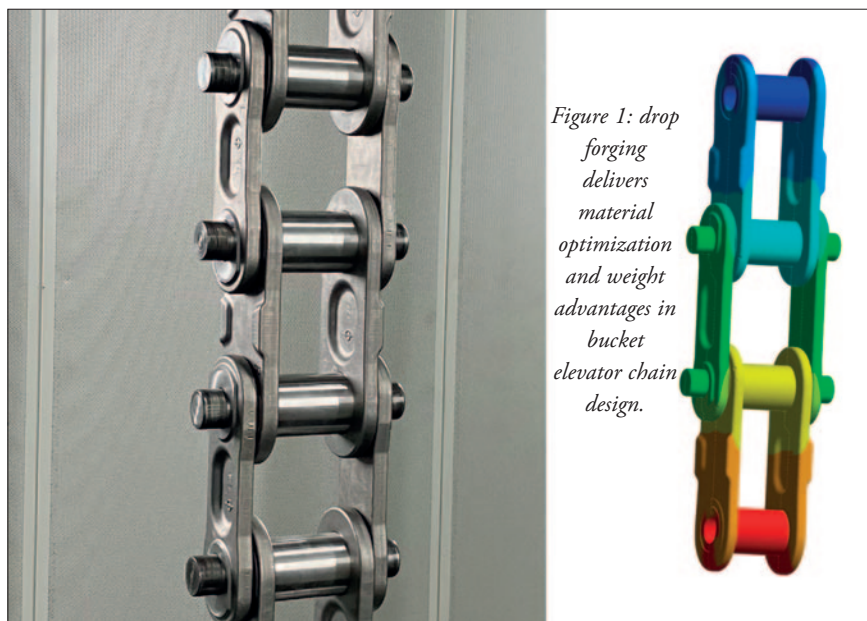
drop forging delivers material optimization and weight advantages in bucket elevator chain design.
